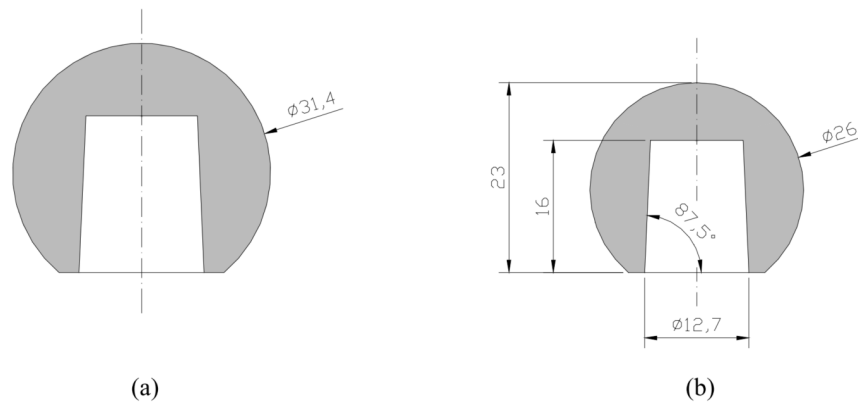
Ceramic femoral head for hip replacement: (a) Dimensions after green machining, and (b) after sintering and finishing, units in mm [9].
